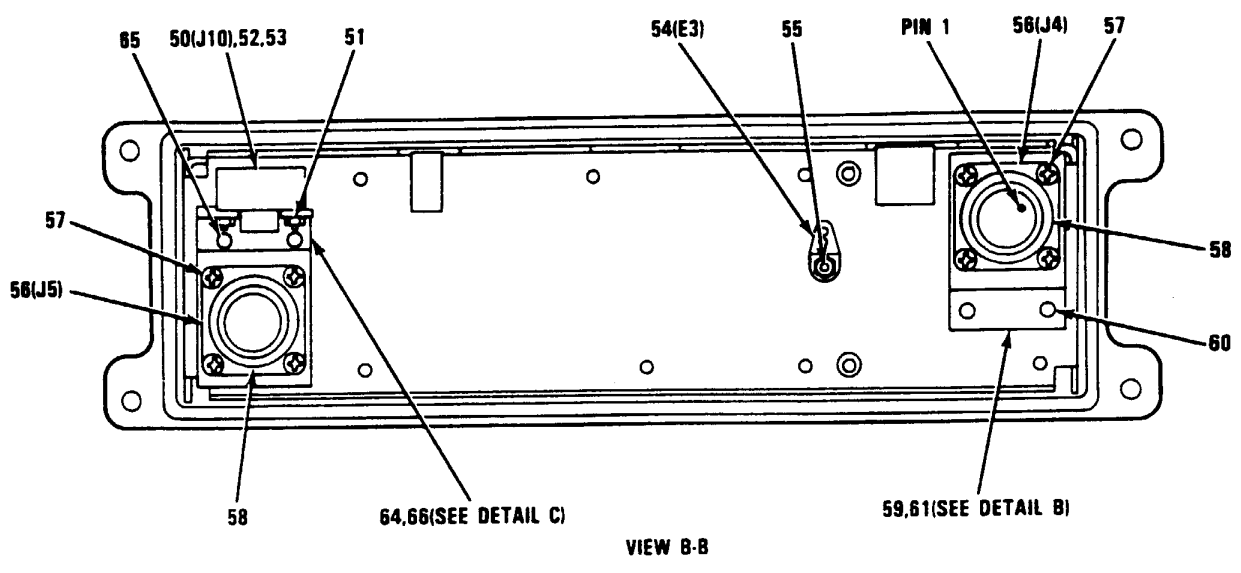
Electrical Chassis Assembly (Sheet 1 of 3)
